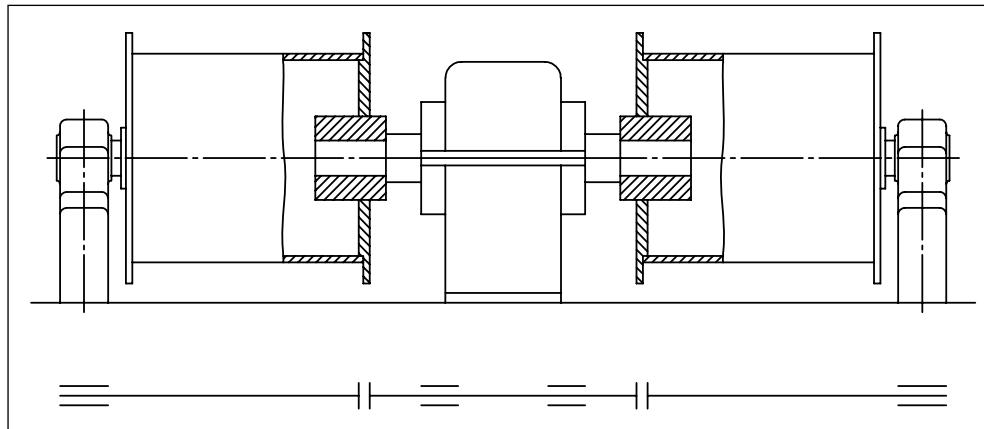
Layout of a twin drum drive with four-point beared rigid shaft without a Drum-Coupling.
